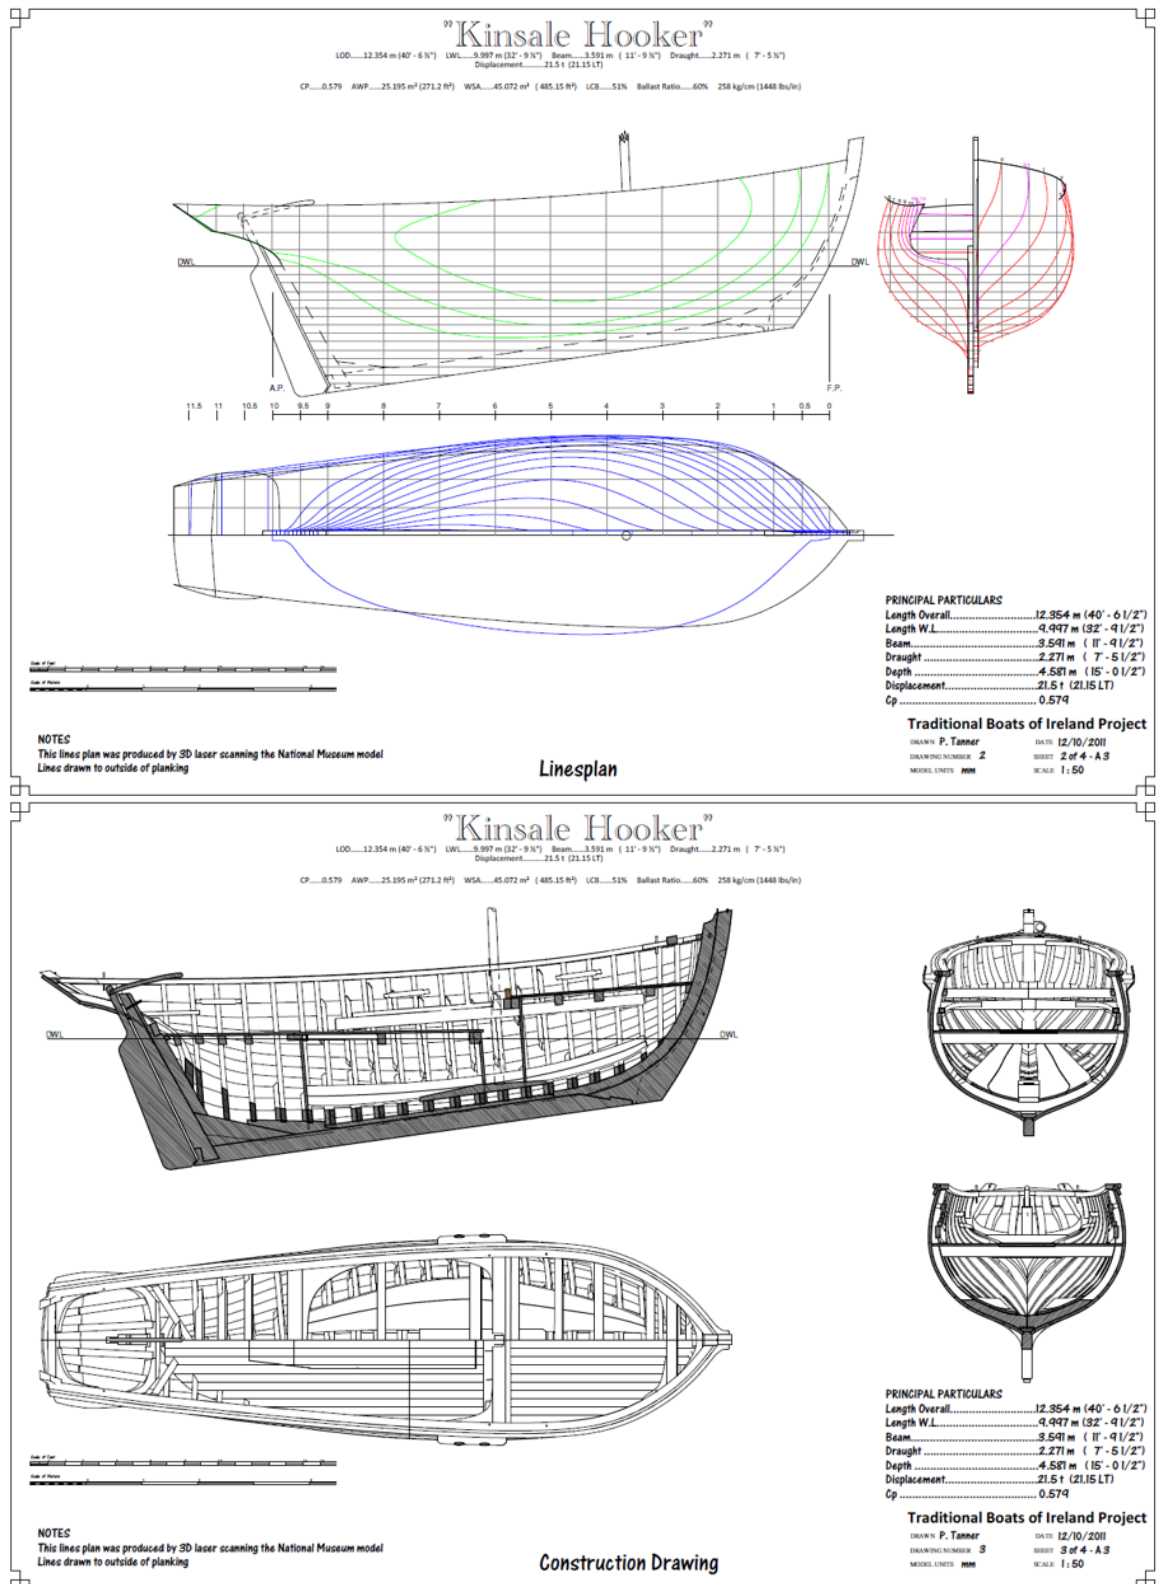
Kinsale Hooker lines plan and construction drawing (Pat Tanner)
